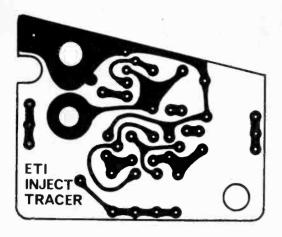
Pcb foil pattern for the circuit. Shown full size. The large areas of copper are where the sockets fix directly to the board.
